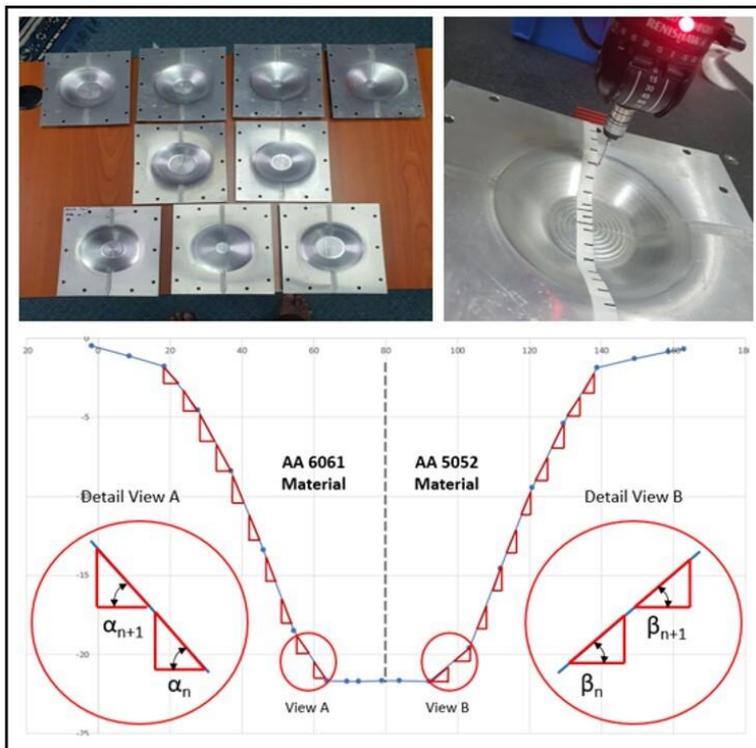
Measurement process on formed parts using coordinate measuring machine (CMM)
